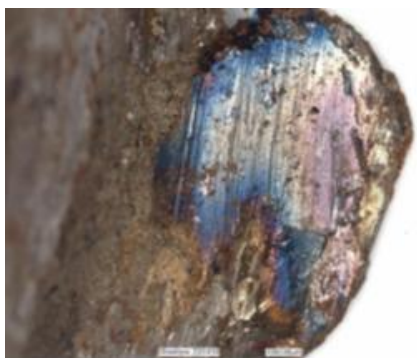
View of the fracture surface of a fragment of the damaged rim with a zone indicating the presence of local overheating, as evidenced by bluish deposits on the oxidized parts of the surface
